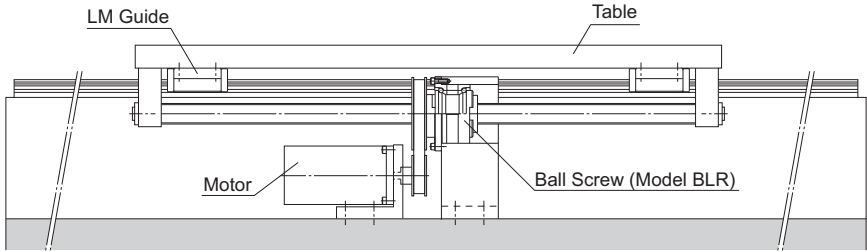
Example of Installation on the Table (Ball Screw Nut Fixed)
